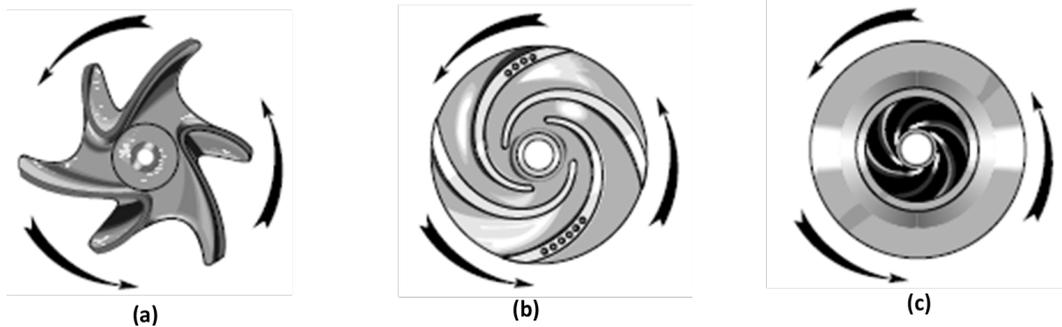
Impellers: (a) open; (b) semi-open; (c) closed.
